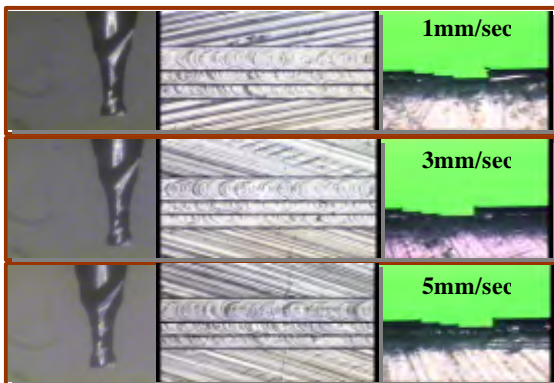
(c) Machining surface and burr shapes in accordance with machining conditions to 150,000rpm
